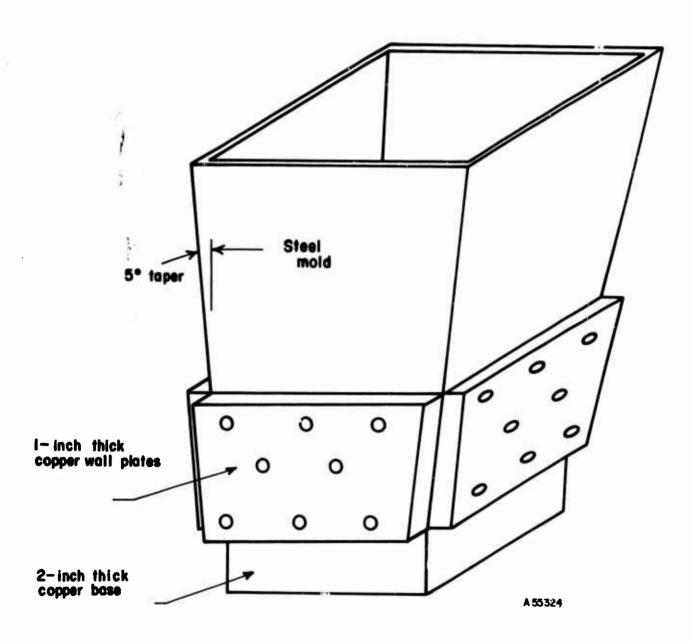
SECOND MOLD DESIGN USED FOR CASTING 50-POUND LA141 ALLOY INGOTS
